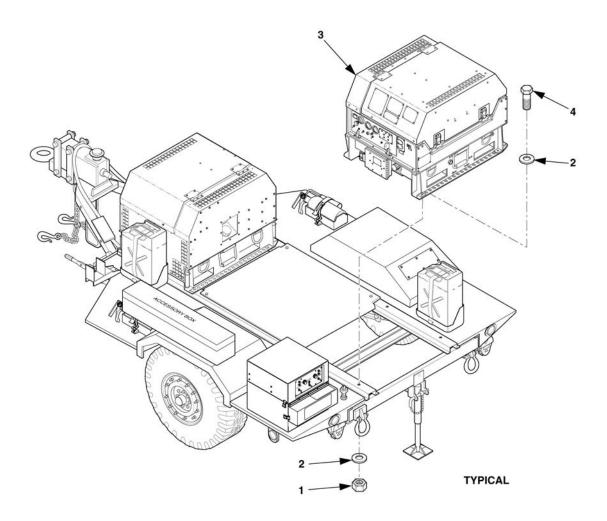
Removing Generator, 3kW Mounting Hardware.
